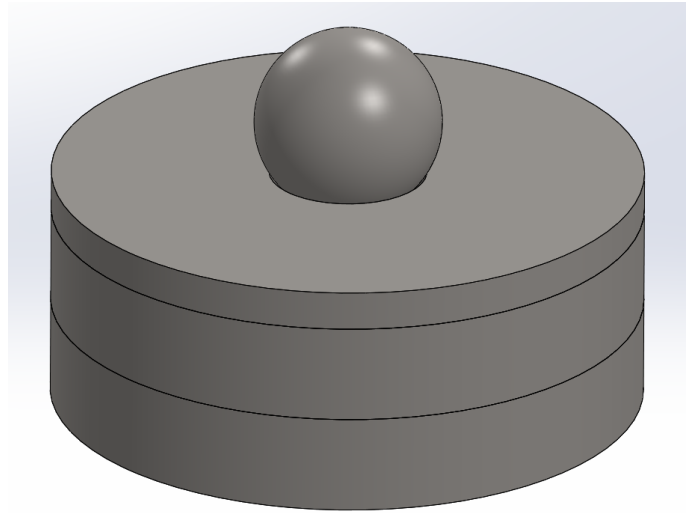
Prototype of spacer tool for wheel face assembly.
